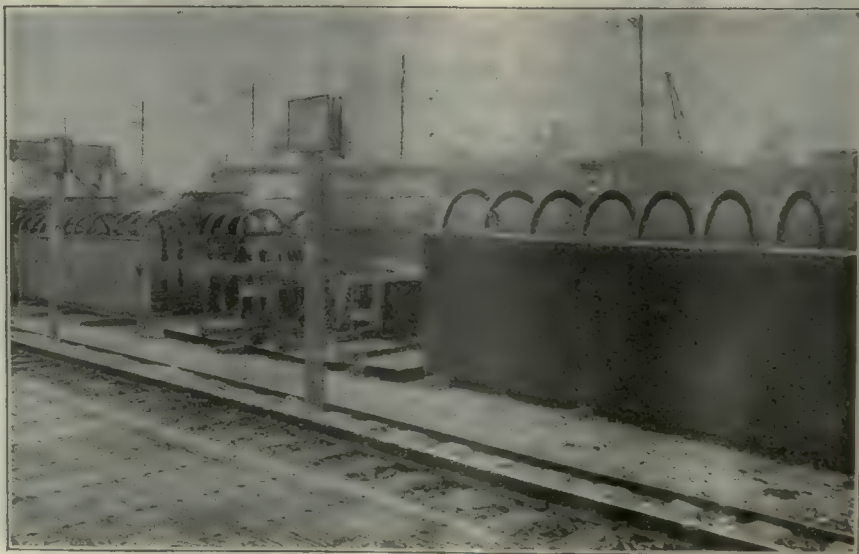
ASSEMBLING THE SHAFT ALLEY
